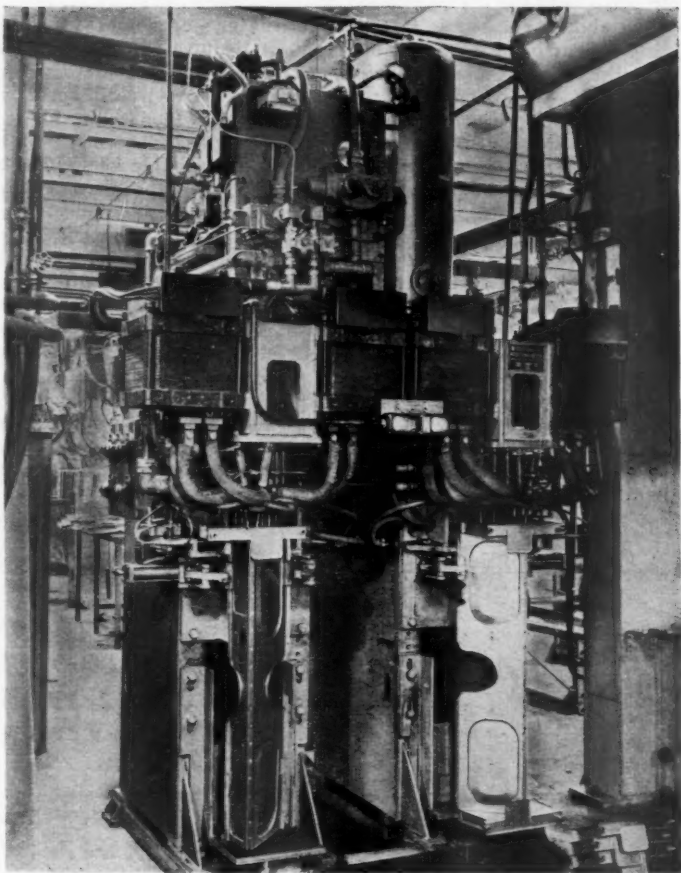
Smaller open-faced press welder (Vauxhall Motors).
